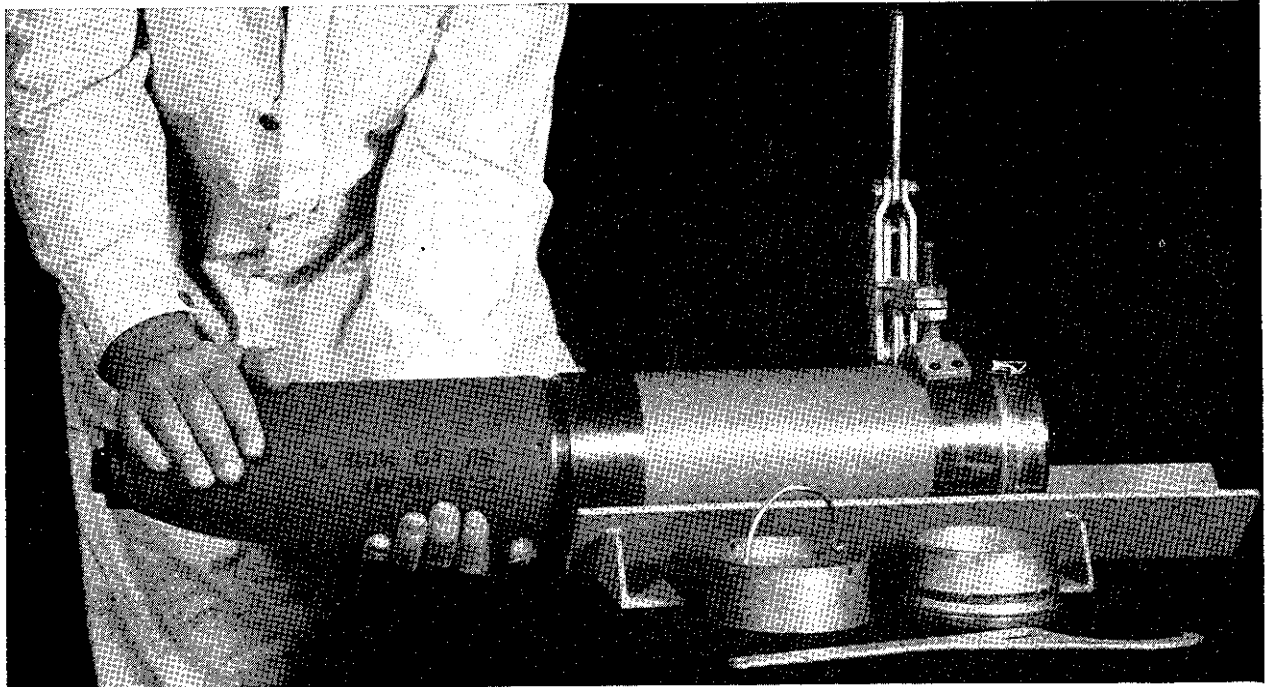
Use of Assembly Kit Mk 2 Mod 0 in Threading of Head to Motor by Hand.
